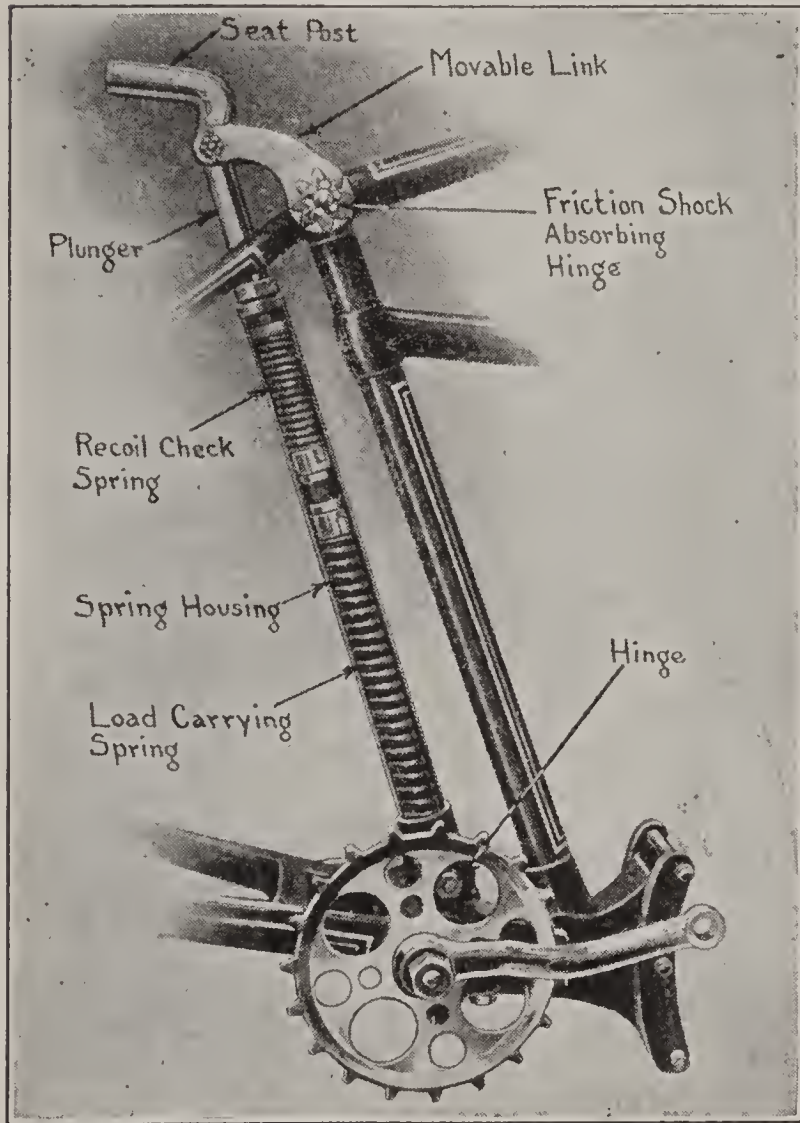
Spring Supported Seat Post of Reading-Standard Motorcycle.
